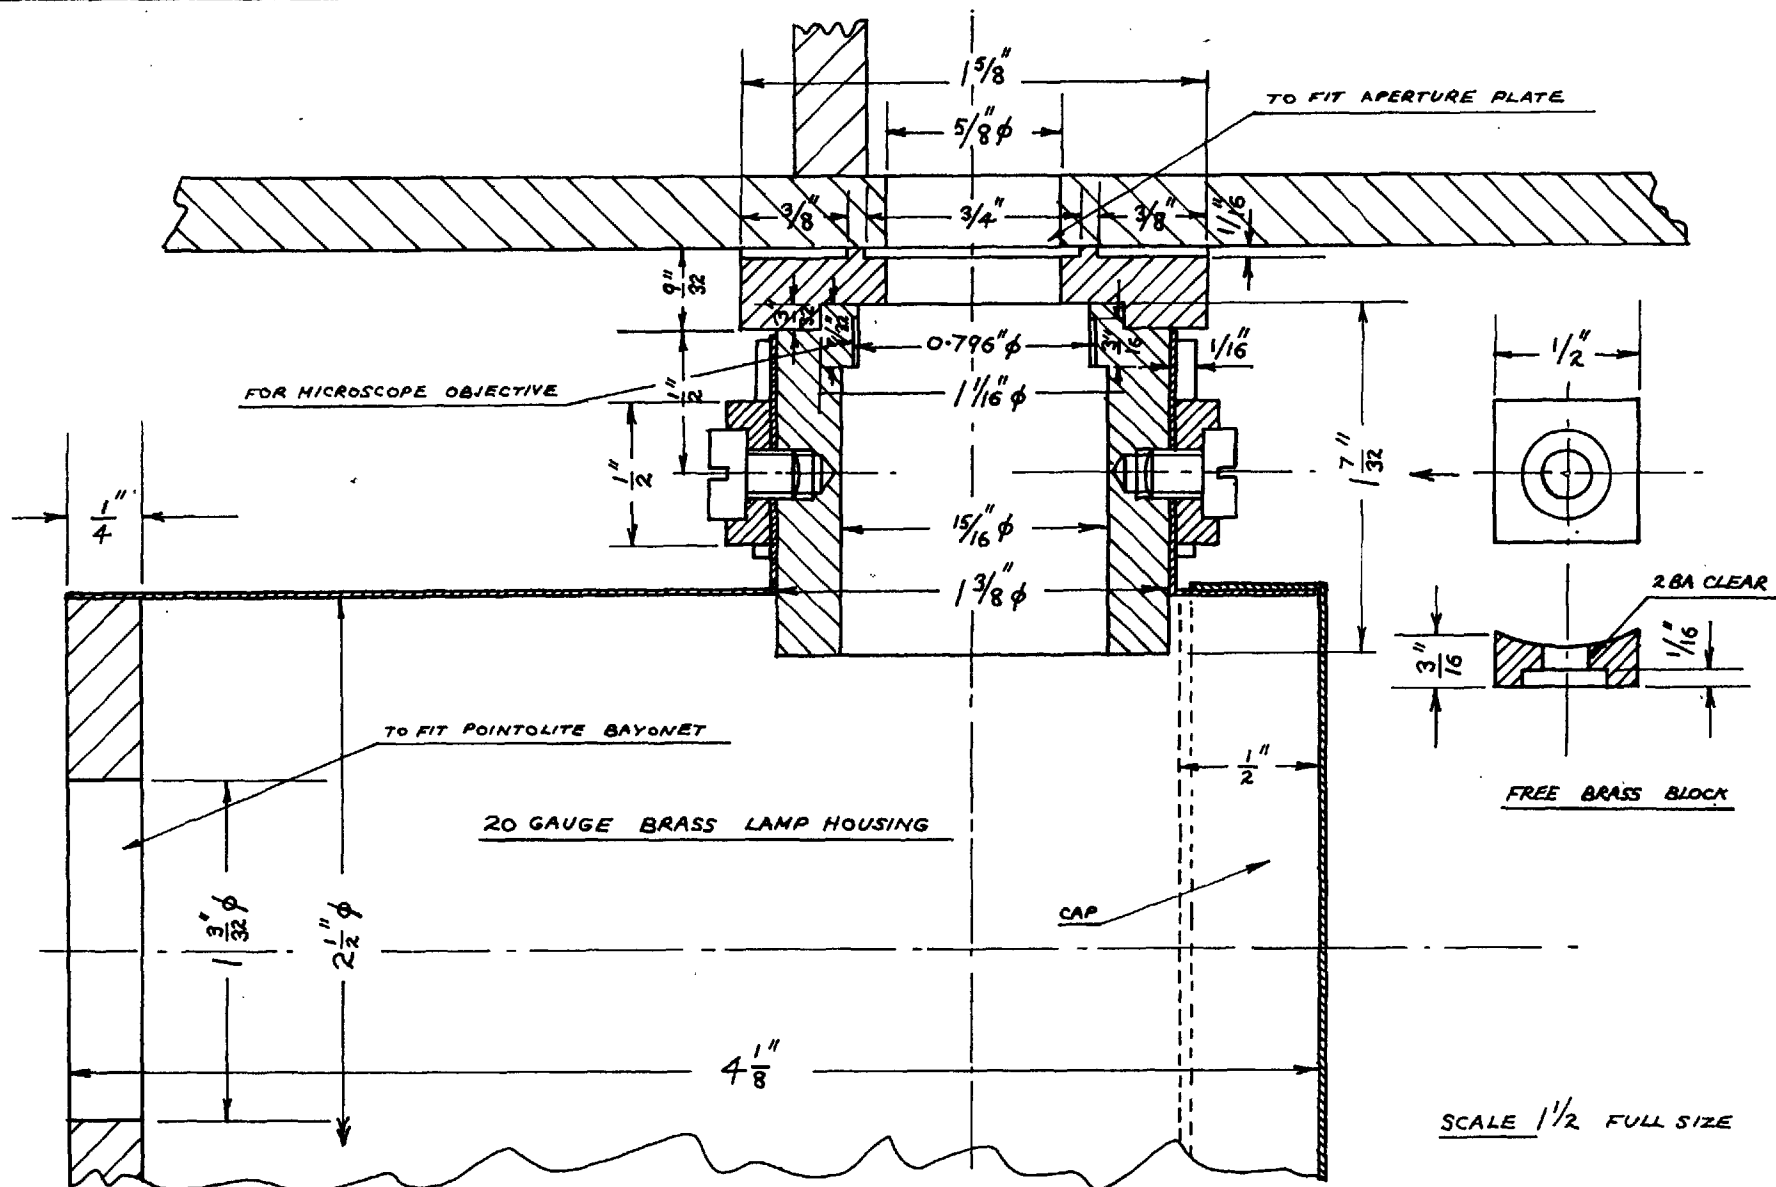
LAMP HOUSING AND LENS TUBE
